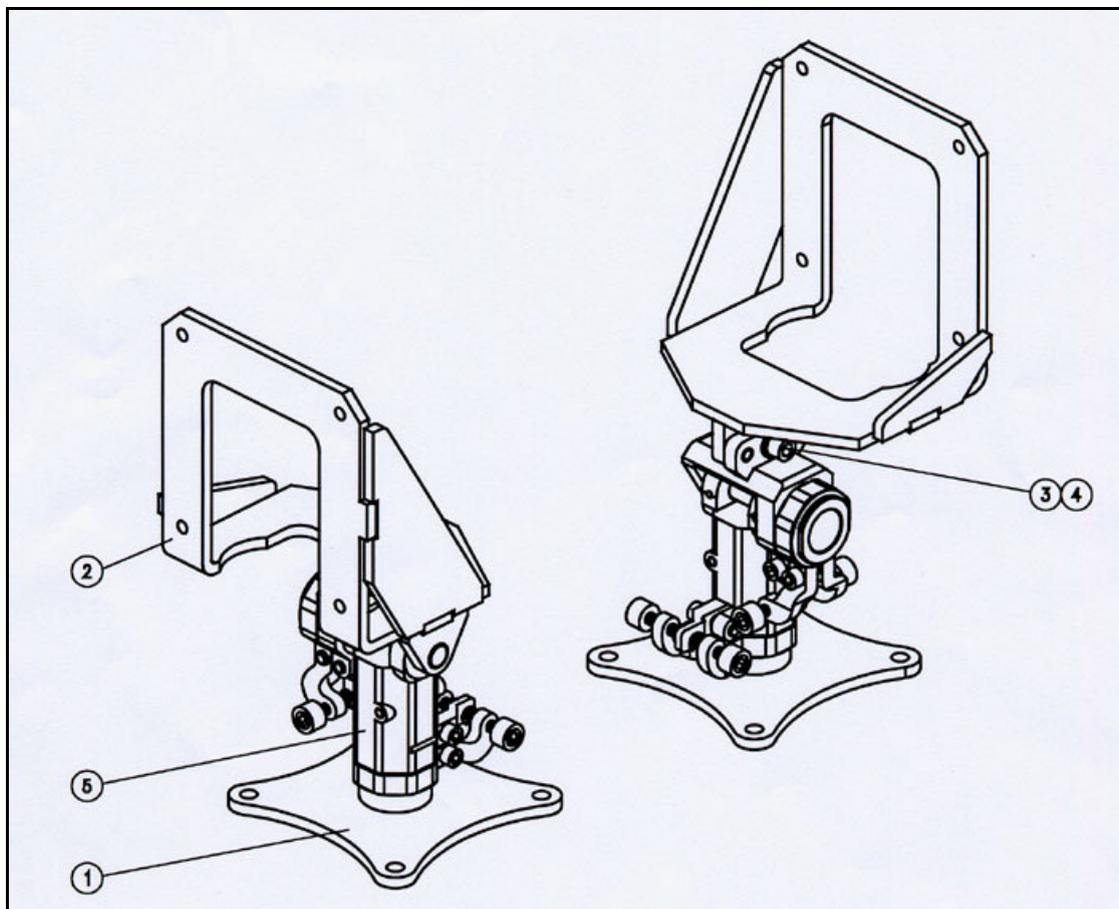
Detector/Light Source and Swivel Mount Assembly for Standard Installation
